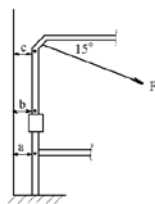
View of section frame with seat bearers and deformation measuring points.
